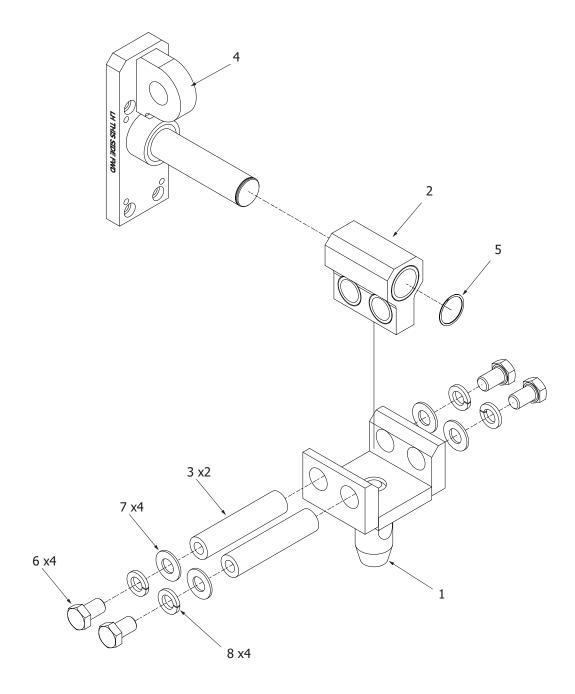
AGSE-E25960-S01 Fixed FWD Mount Assembly - LH
